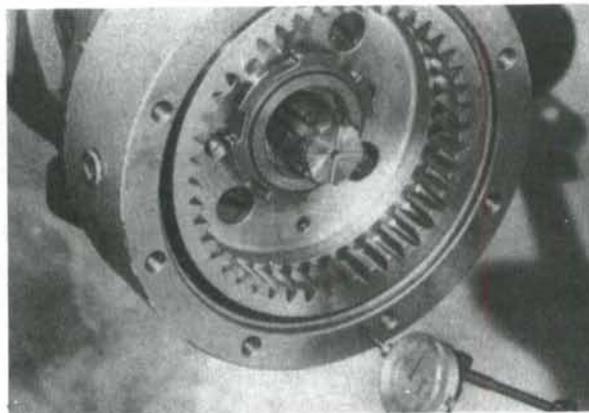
To set stub axle bearing preload, mount a dial indicator so probe contacts face of wheel hub. Measure end play and refer to text.
